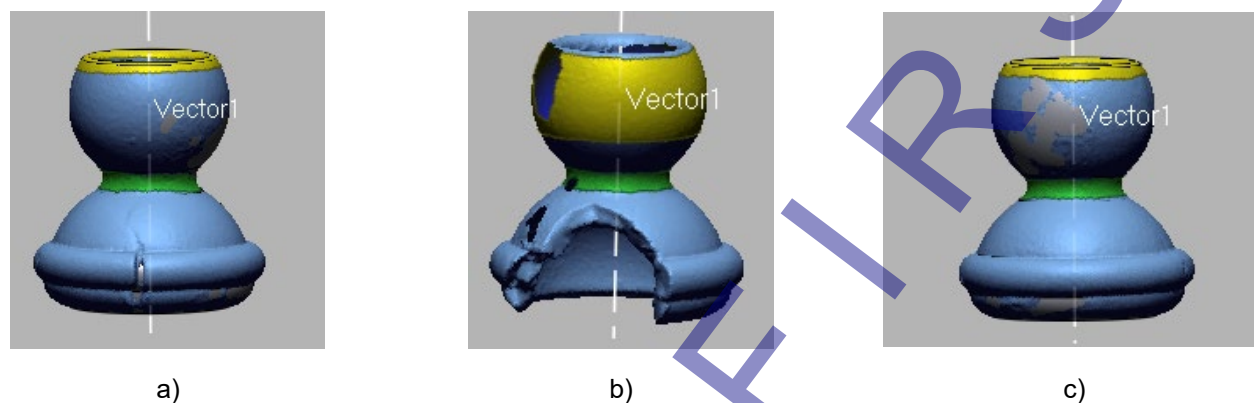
Axis of rotation: (a) partially damaged component with cracks; (b) completely damaged component with a missing geometric segment; (c) undamaged component
